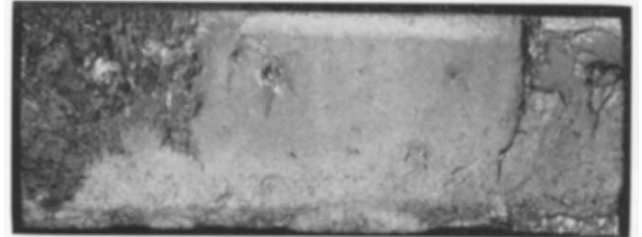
Fatigue Fracture of Quench-Cracked Bending Fatigue Cast Steel Specimen.
